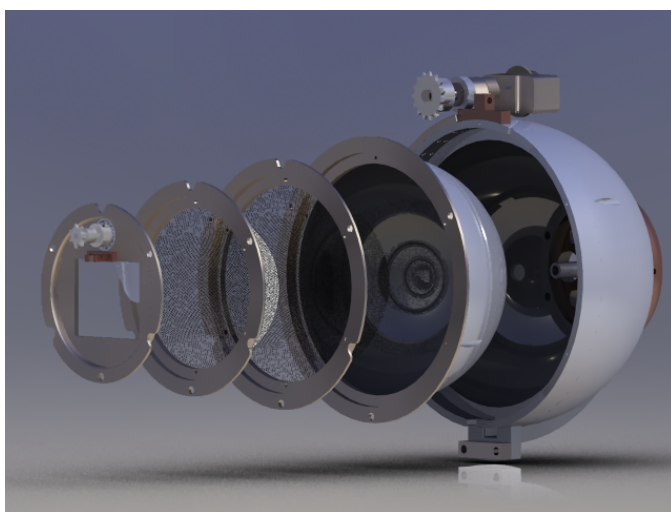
Exploded view of the HGRFA to show isolated rings with attached hemispheres.
